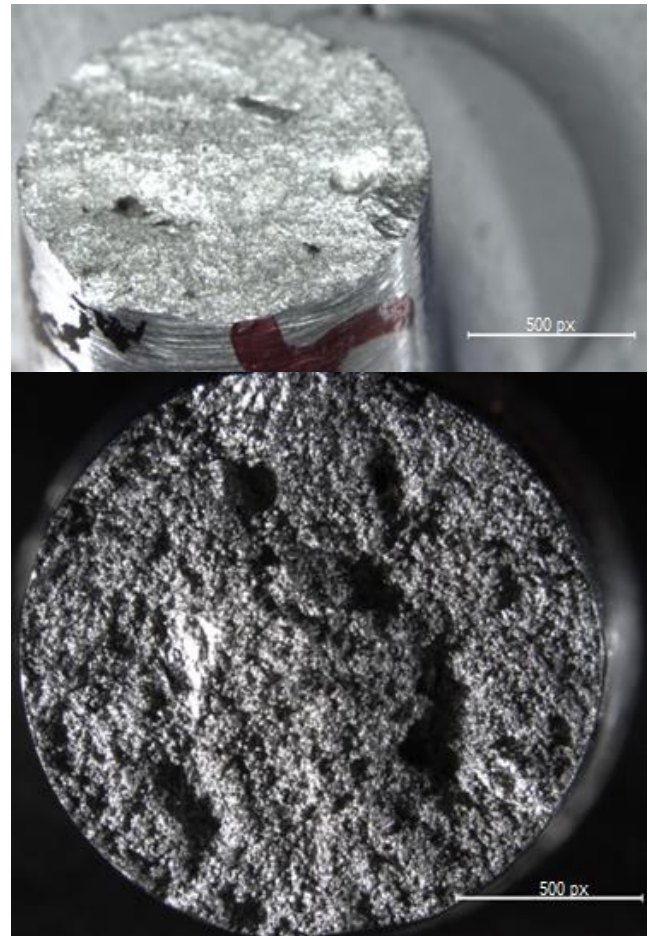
Fractured surface morphology after tensile test of aluminium alloy
